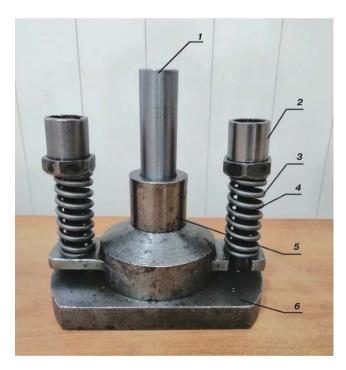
Stamp (without top plate) for drawing without wall thinning and flanging:
